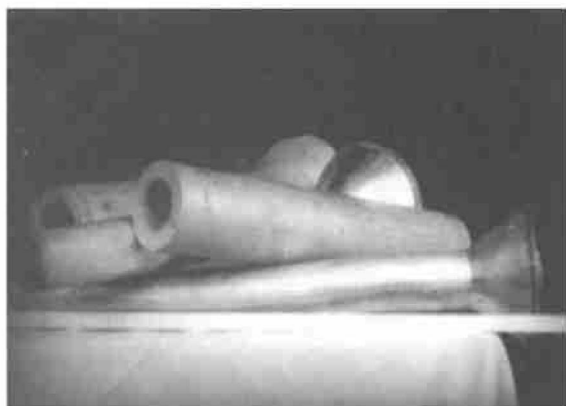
Photo of composite tubes and bars formed by liquid extrusion
